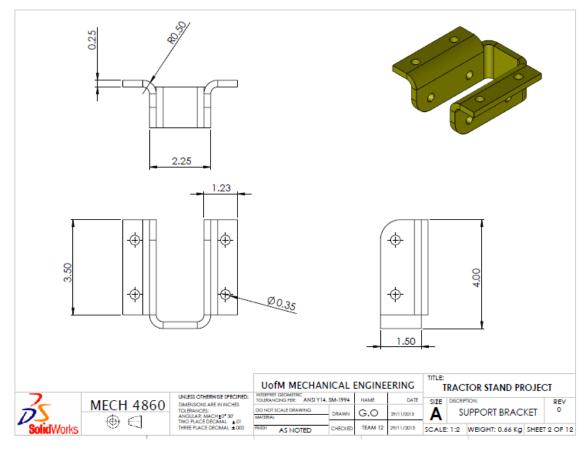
Drawing of Connector Bracket, with dimensions shown in inches
